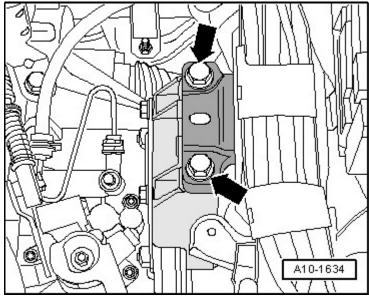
Mounting Camshaft Locating Tool T40070 To Both Cylinder Heads And Tightening Bolts
